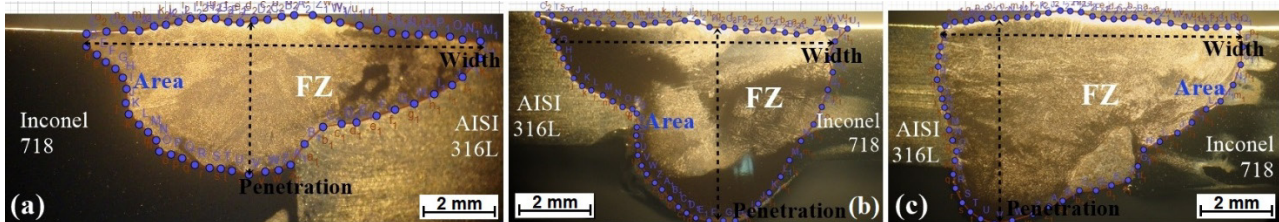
Macroscopy of the welded samples: (a) Sample 1. (b) Sample 2. (c) Sample 3.
